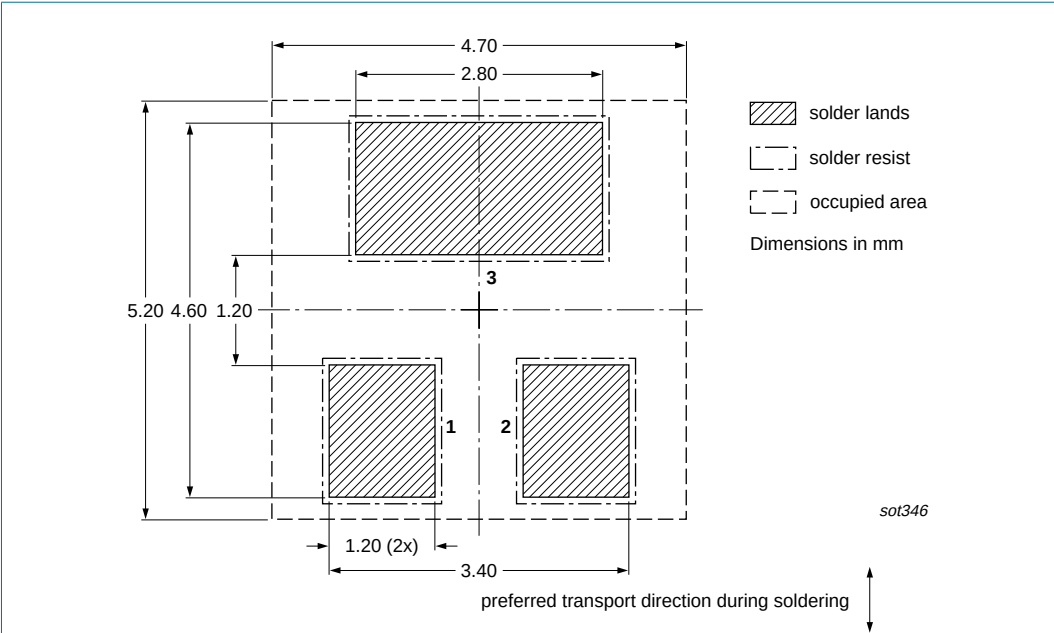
Wave soldering footprint SOT346 (SC-59A/TO-236)
